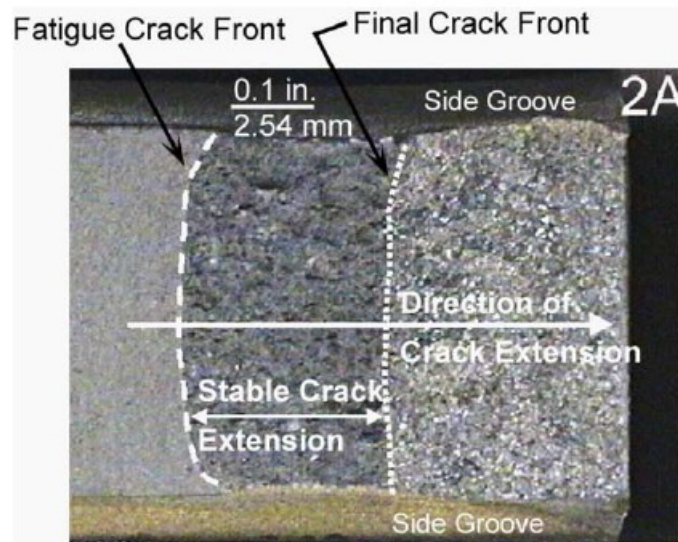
Typical fracture surface of A285 SENB specimens.
